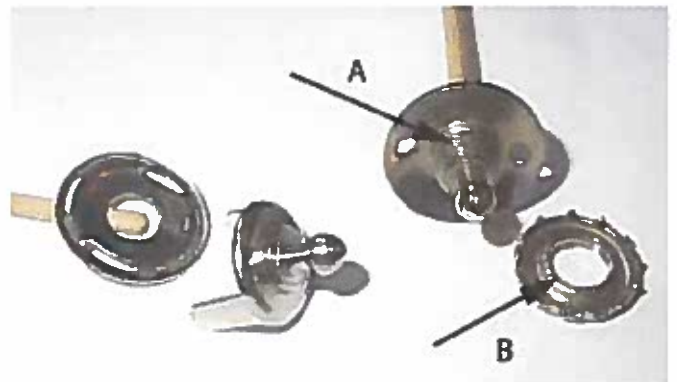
Special carpet-mounting Tenax studs available today (left) have tangs that poke through the carpet and spread behind a backing plate. The original carpet-mounted Tenax studs (right) were integral with their back plate. They had threads (A) that a pronged nut (B) screwed onto. Once the nut points engaged the carpet the stud could be tightened from behind using the standard Tenax 2-prong tool.
